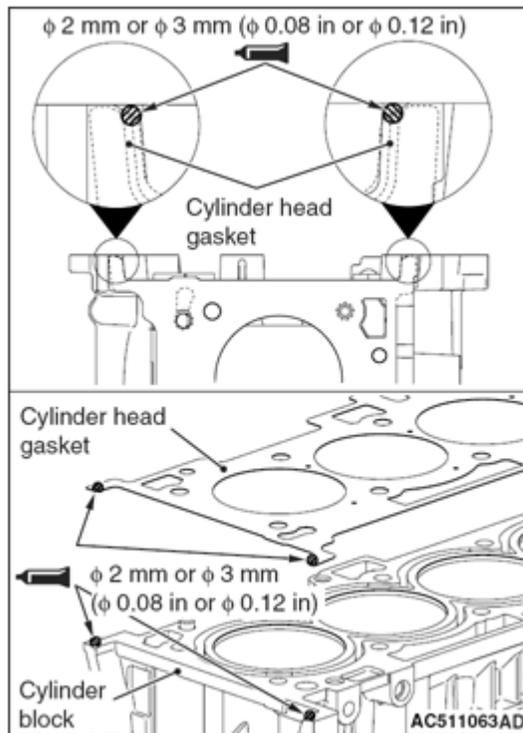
Applying Sealant To Top Surface Of Cylinder Head
